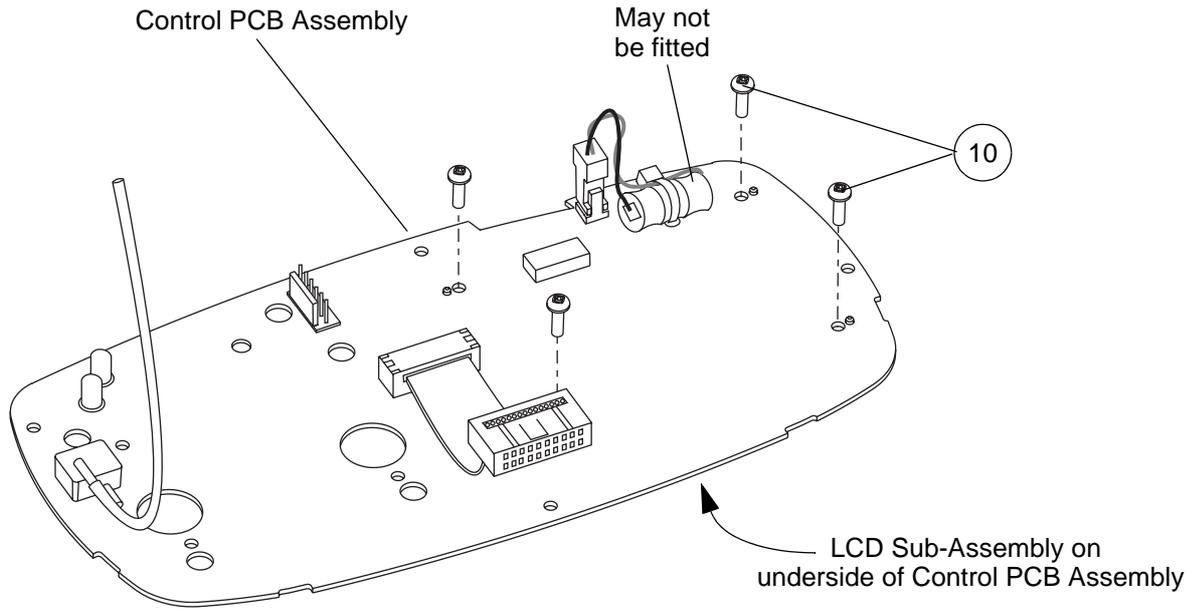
Removing the LCD Sub-Assembly Screws from the Control PCB Assembly
